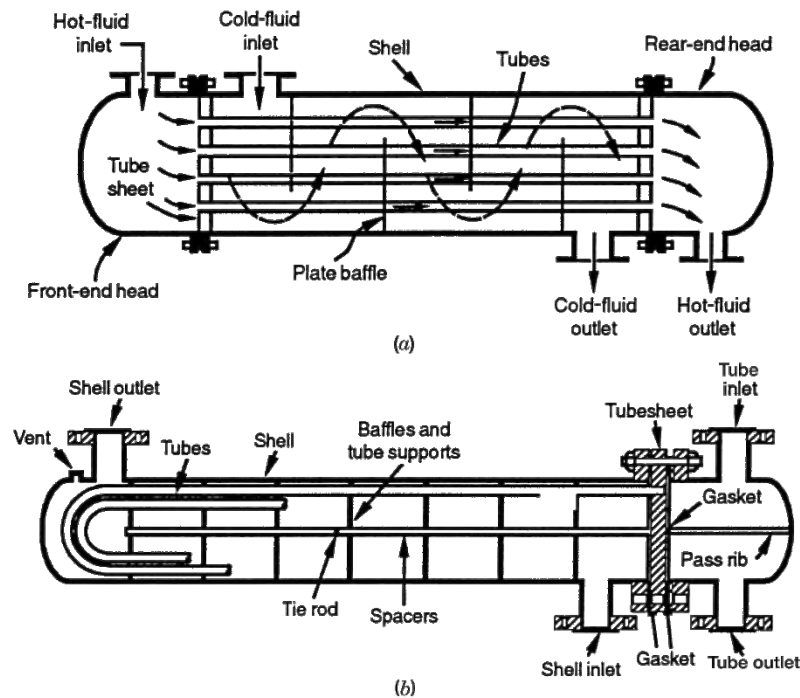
(a) Shell-and-tube exchanger (BEM) with one shell pass and one tube pass; (b) shell-and-tube exchanger (BEU) with one shell pass and two tube passes.
